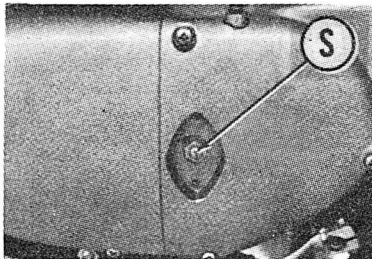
Clutch adjusting screw (S) is located under small plate on left side of engine. Make certain that lock nut is tightened after adjustment is complete.
